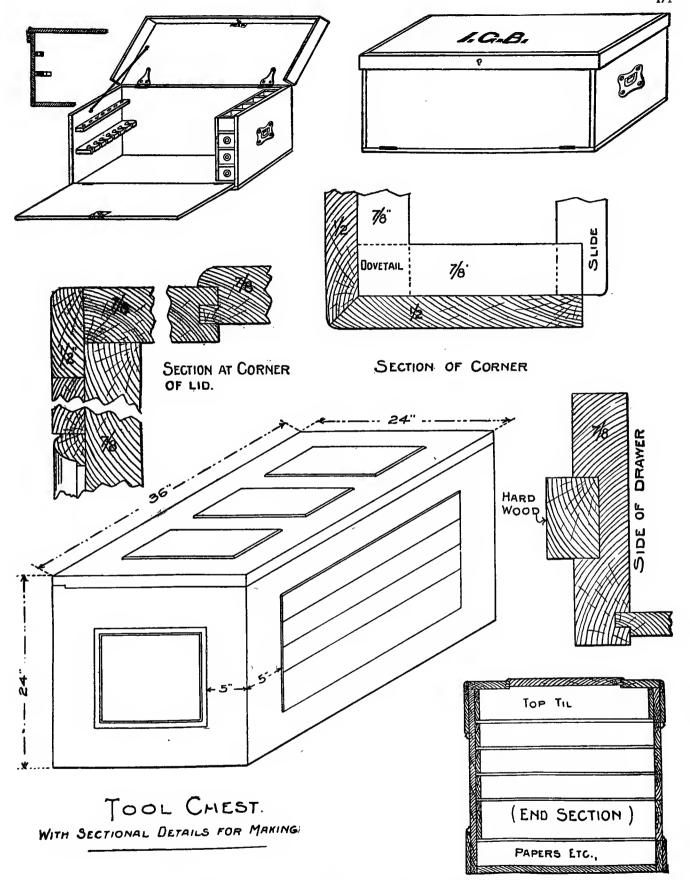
CHEST OF DRAWERS FOR TOOLS
